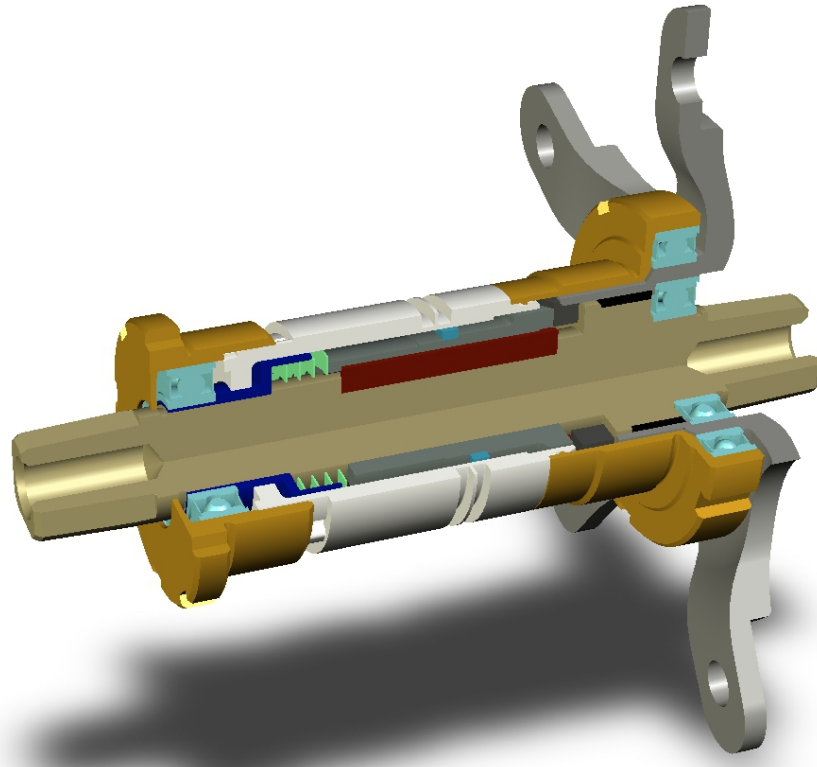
CAD design of the SKF Torque Sensing Bottom Bracket.
